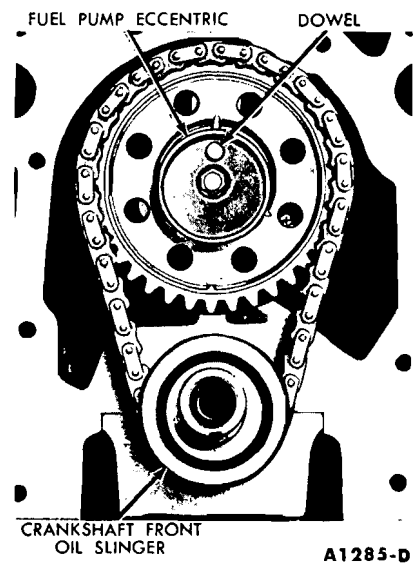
Fuel Pump Eccentric and Front Oil Slinger Installed
